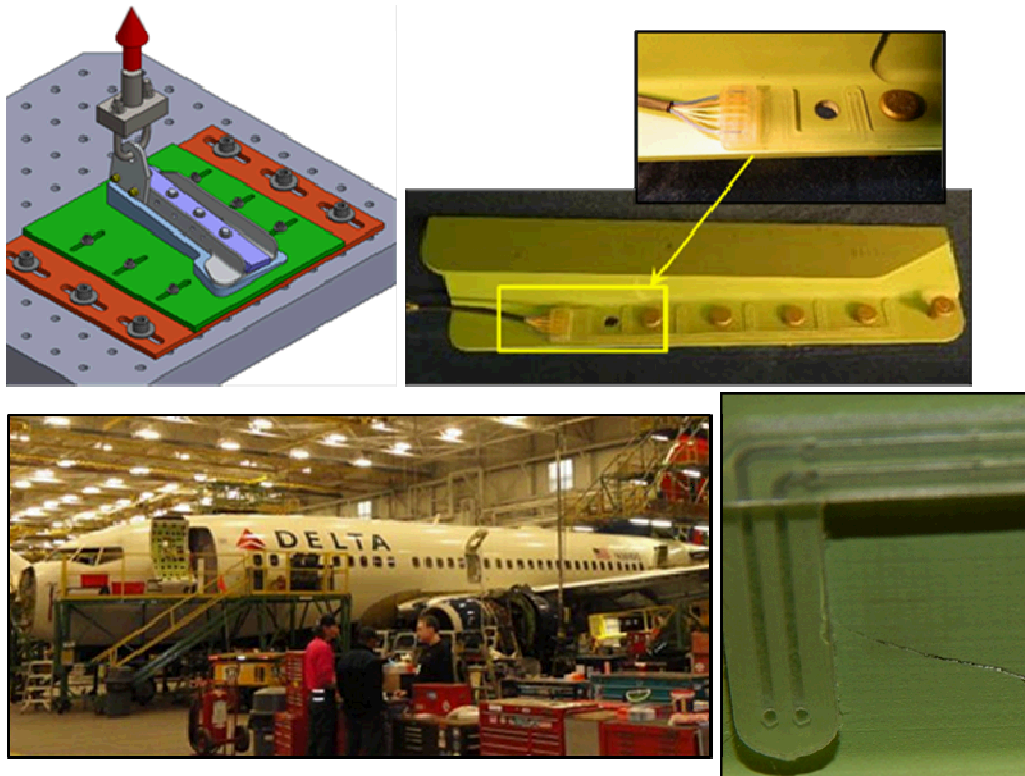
CVM Testing on Wing Box Fitting, Close-Up Showing Fatigue Crack Crossing into CVM Sensor and Installation of CVM Sensors on Delta Air Lines Aircraft for Flight Tests
